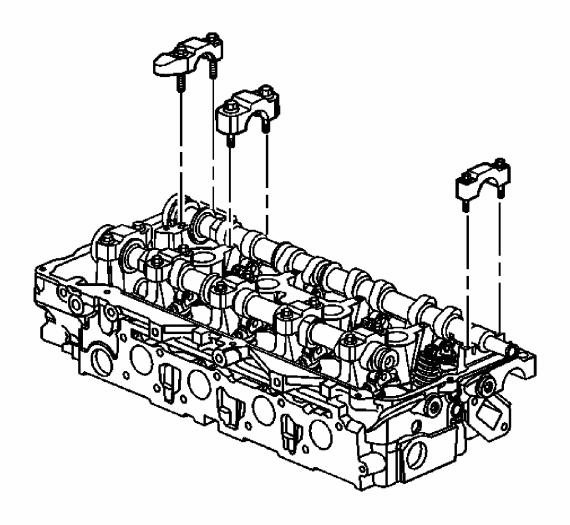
View of Left Intake Camshaft Bearing Caps Courtesy of GENERAL MOTORS CORP.
